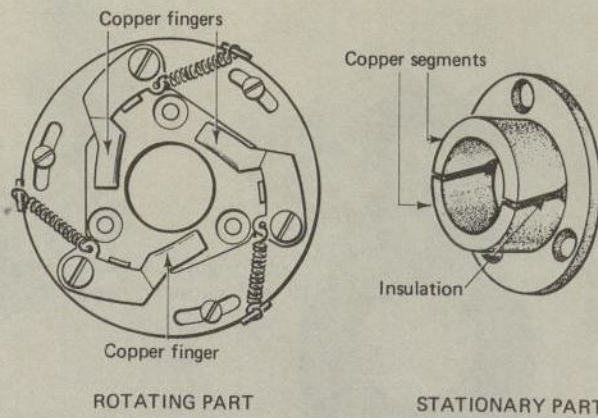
The rotating and stationary parts of one type of centrifugal switch.
